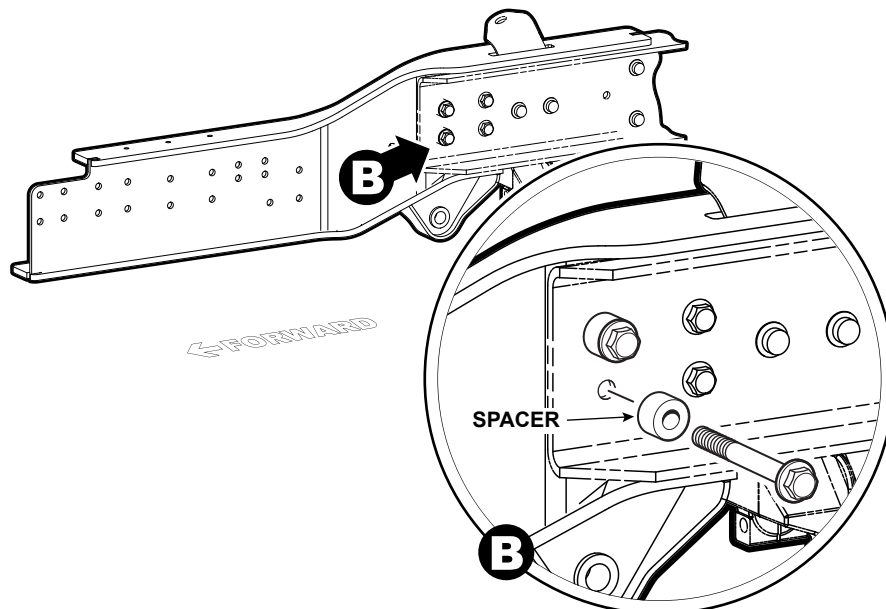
Frame Extension to Frame Rail Installation and Spacer Location RH
